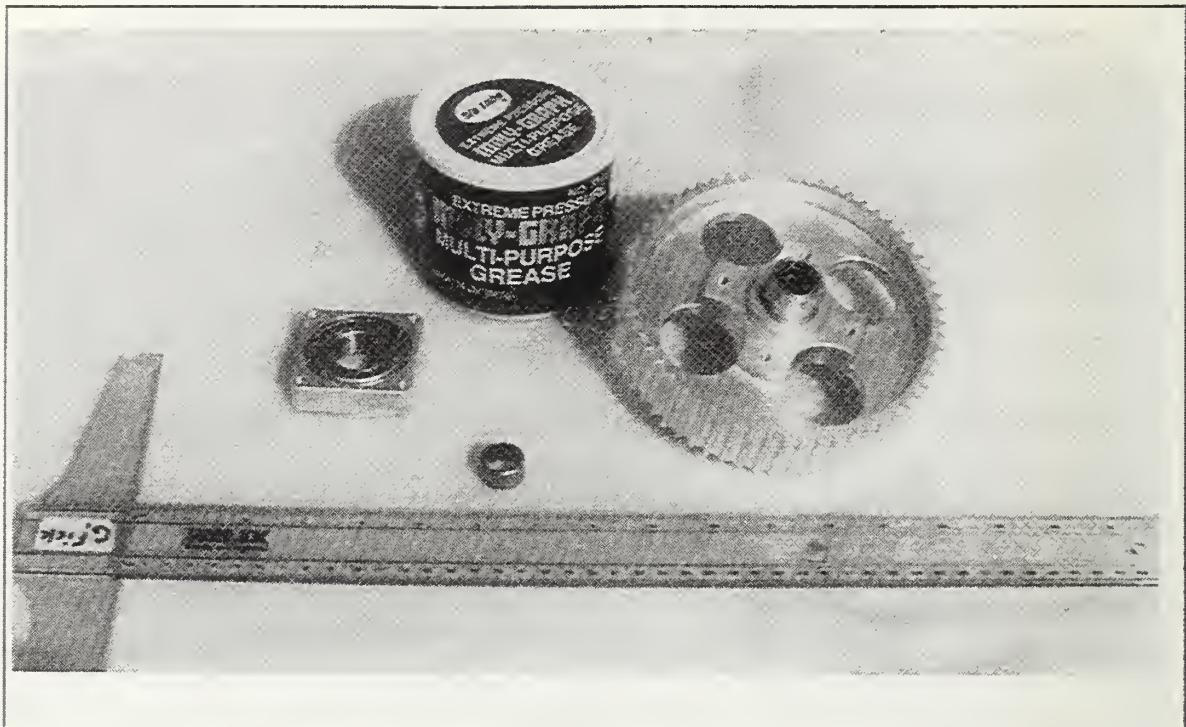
Needle Bearing, Grease, and Transmission Shaft with Bearing Inserted.
